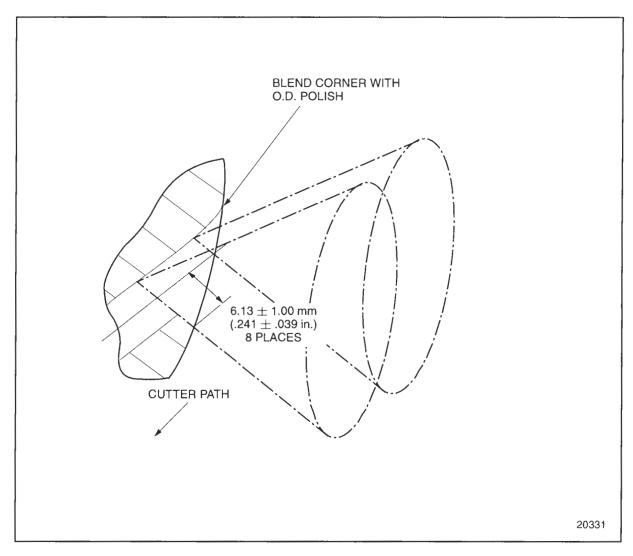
Connecting Rod Journal Oil Hole Chamfer Limits
